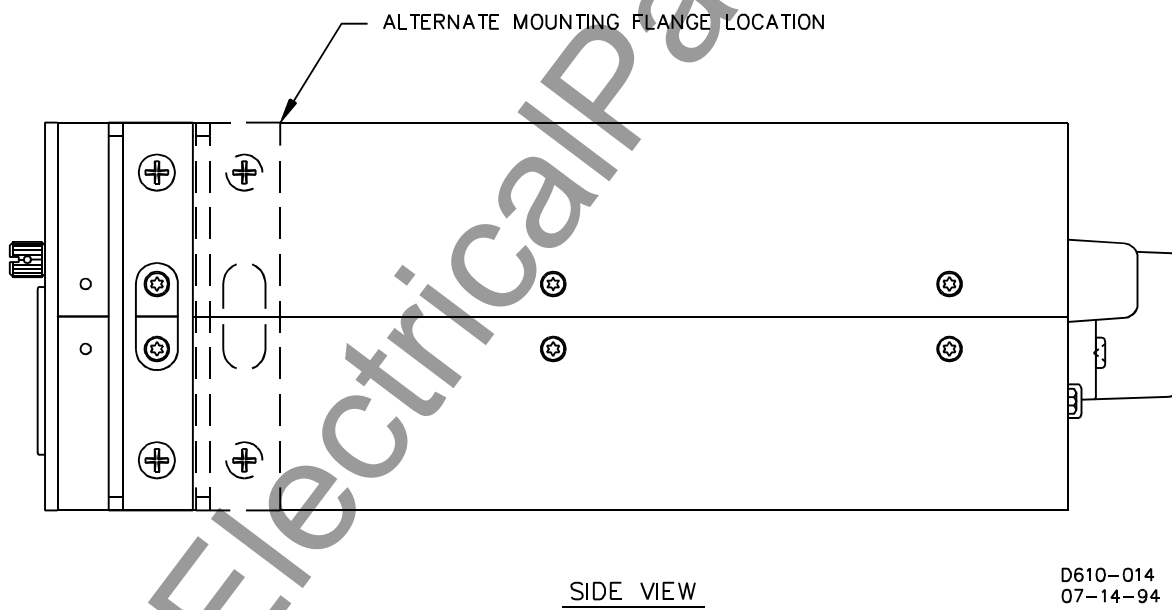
BE1-25/79TR Alternate Mounting Location
